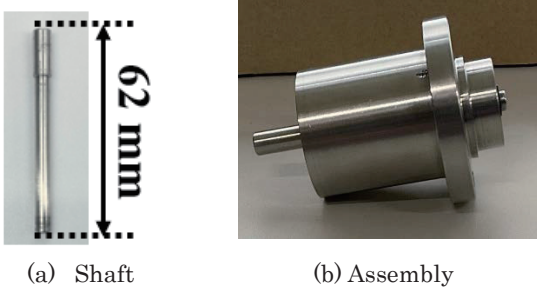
Appearance of the measuring motor used for mechanical loss measurement (Shaft only).
